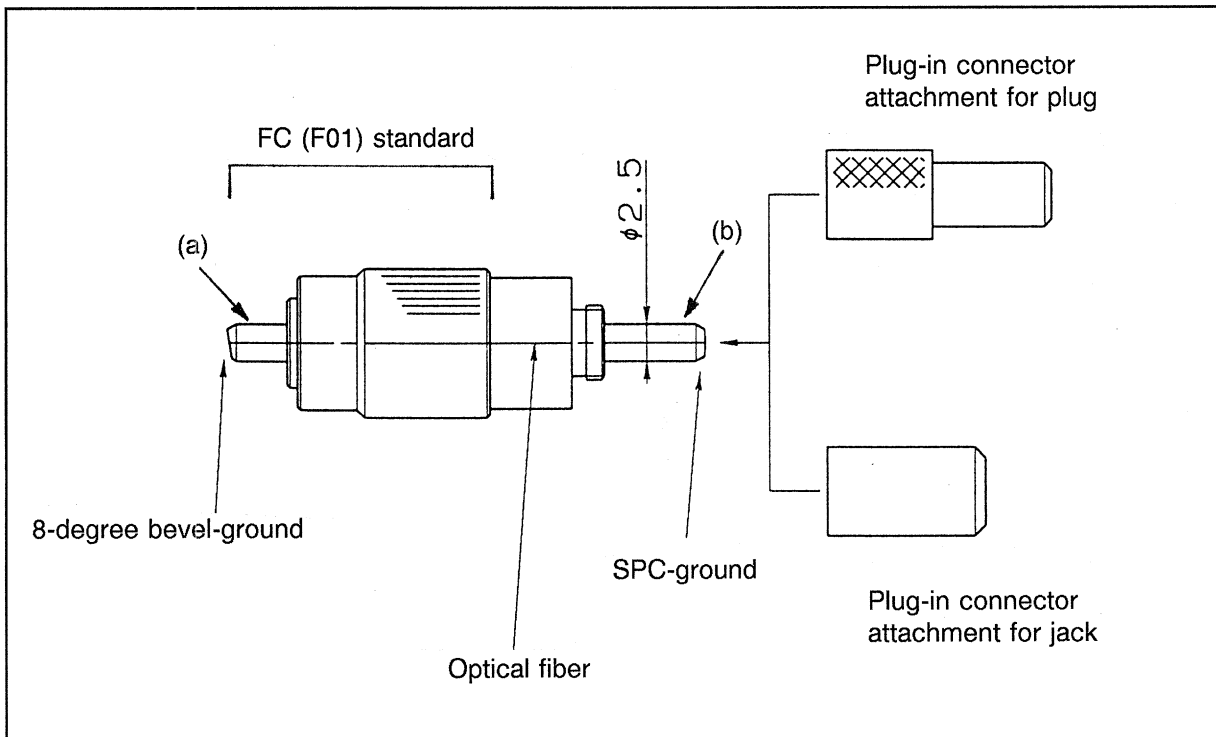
Using Plug-in (For Mounting DS) High Return-loss Adapter
